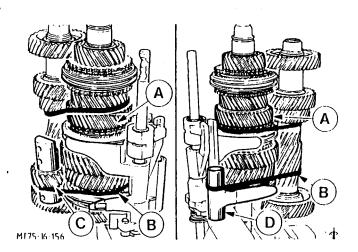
Secure reverse gear idler shaft and 5th/reverse gear selector fork with second cable tie (view from two directions).
